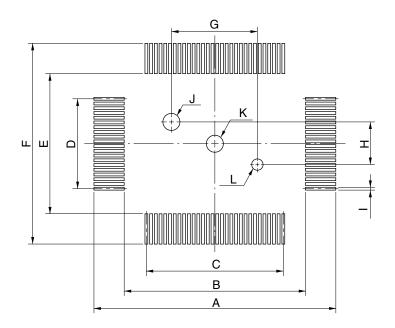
EV-9200GF-100 Package Drawing (for Reference Purposes only)
